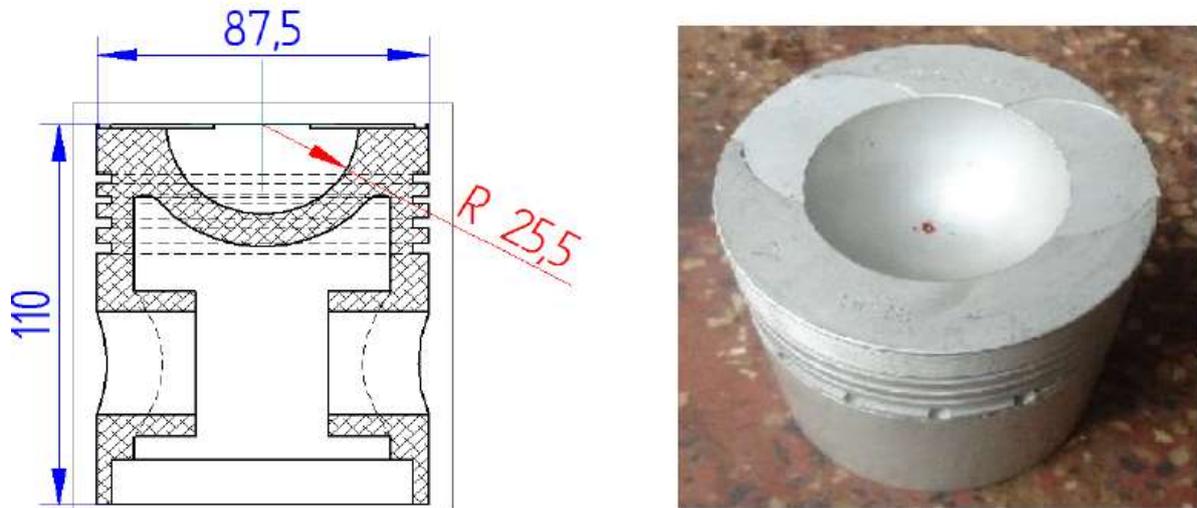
Photographic view of Piston with Flat Bowl, before fabricating.
